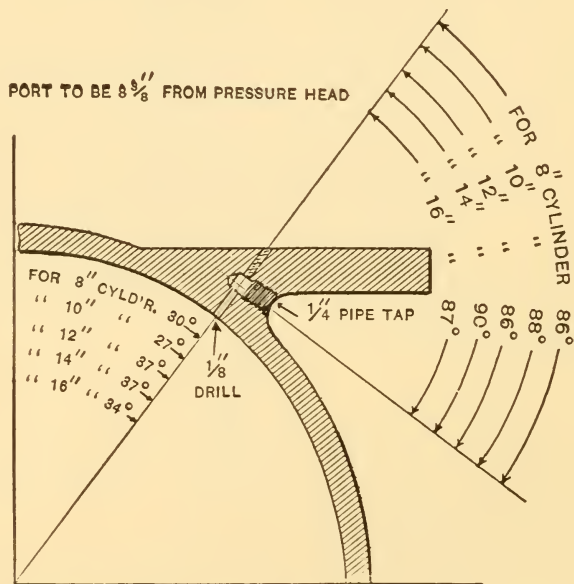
SHOWING PROPER METHOD OF DRILLING BRAKE CYLINDERS WHEN USED WITH THE AMERICAN AUTOMATIC BRAKE SLACK ADJUSTER.
